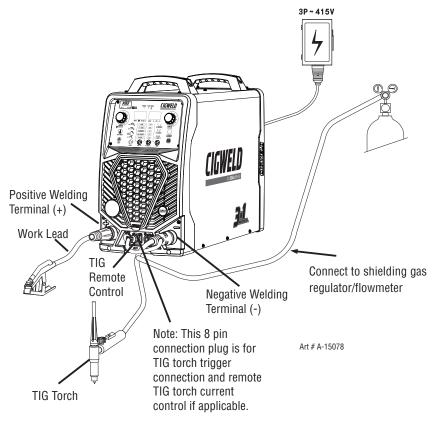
Setup for Lift TIG (GTAW) Welding
